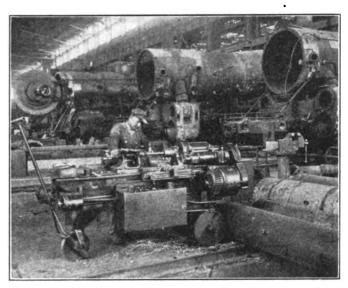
Portable Engine Lathe Used in Fitting Frame Bolts
